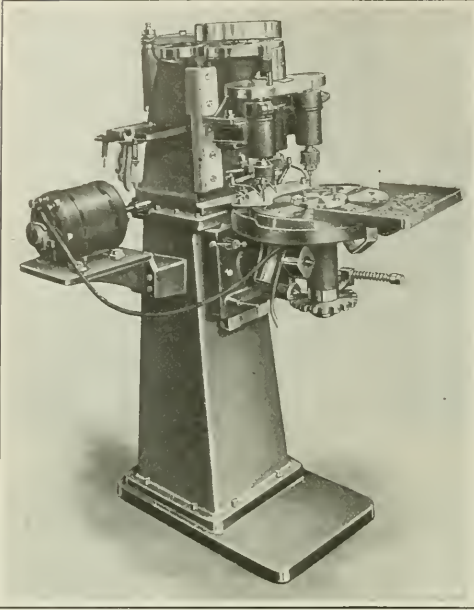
Dial-feed Multiple-spindle Tapping Machine which is a Recent Development of the Anderson Die Machine Co.
